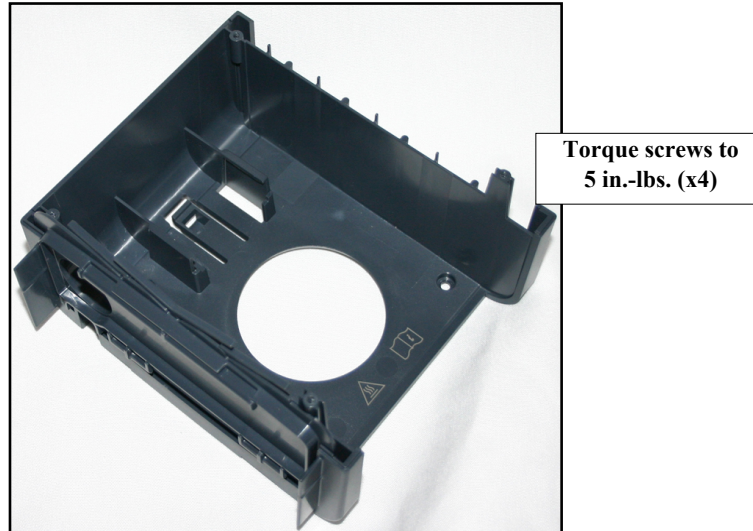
HUMIDIFIER BOTTOM HOUSING
